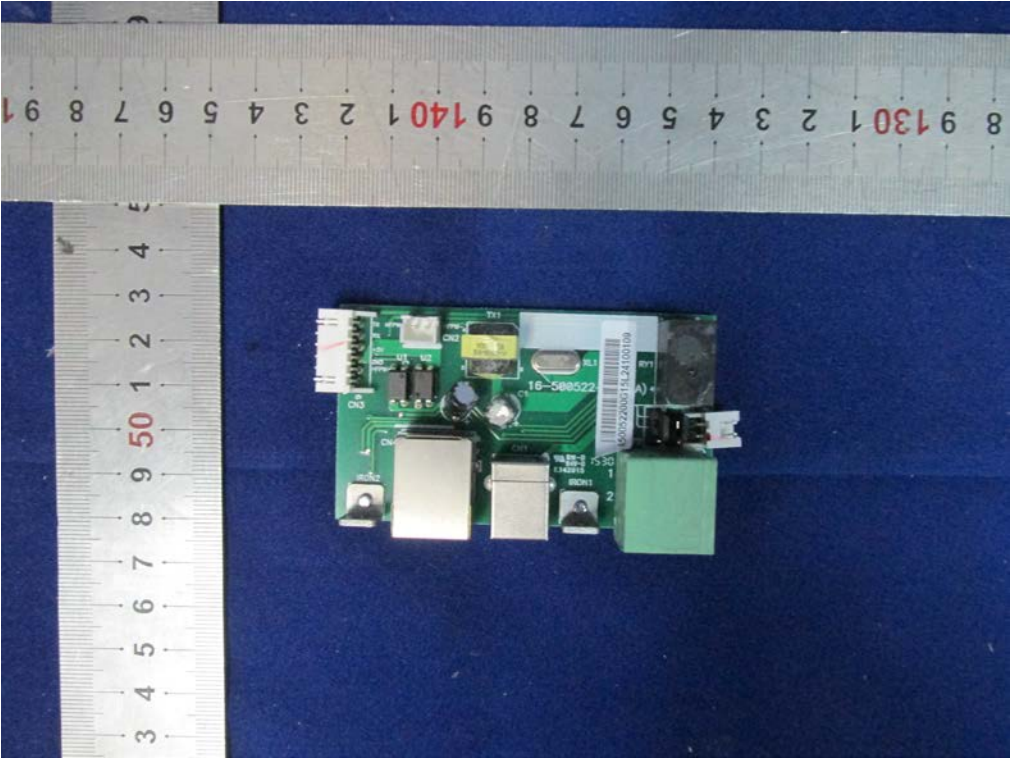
FlinInfini Lite 5kW-48V of COMM board components view
